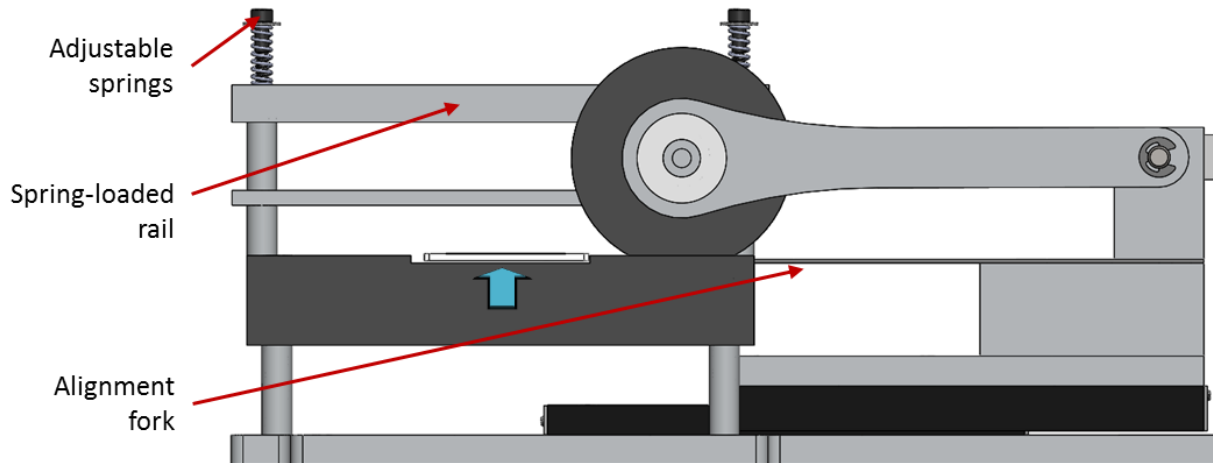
Side view of the tape cutting assembly. The chips move forward into the page. The alignment fork and blade assembly move right to left. The blades are pressed down by spring-loaded rails with adjustable force.
